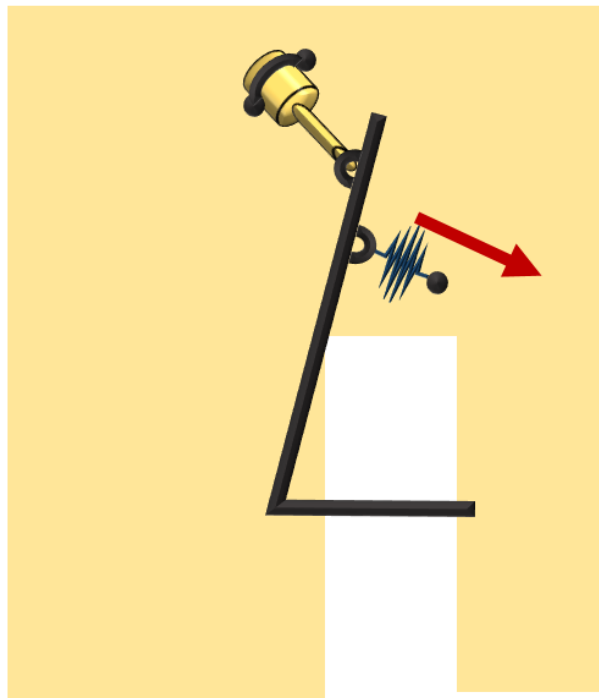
Secure Lock using Solenoid, spring and V-rod
